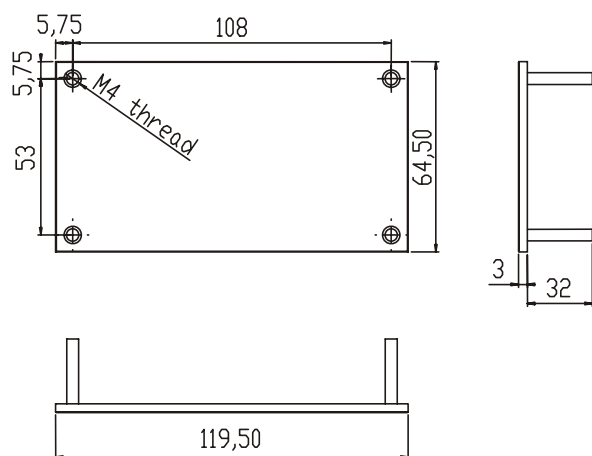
Dimensions of the MasterView Classic panel. All dimensions are in mm
